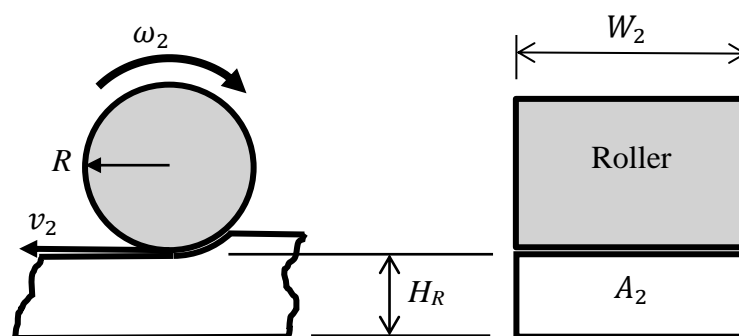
Side view of roller and exit channel (left), front view of roller and exit channel (right)
